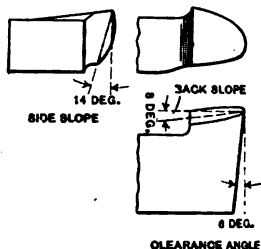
Clearance and Slope Angles of Cutting Tools.
